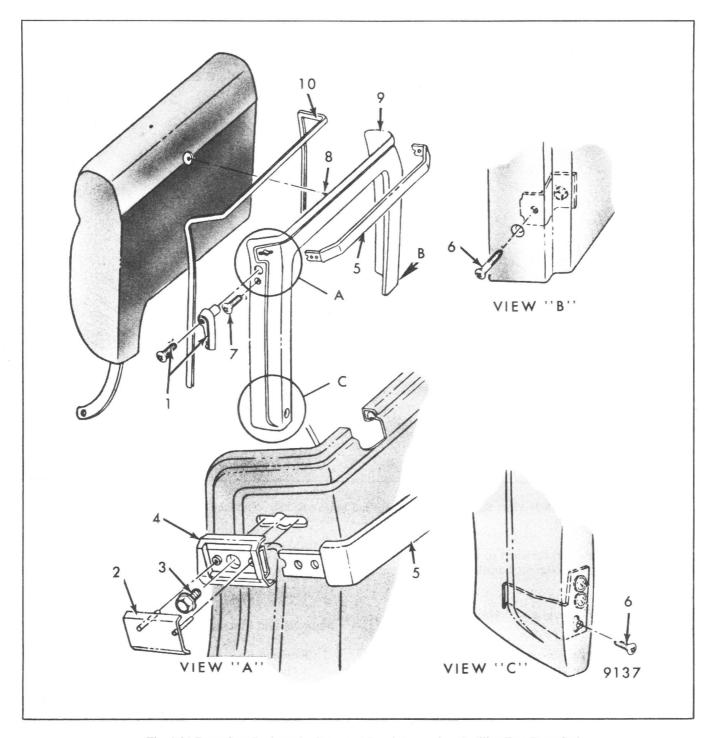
Front Seat Back Assist Strap and Panel Assembly - Cadillac Two-Door Styles
